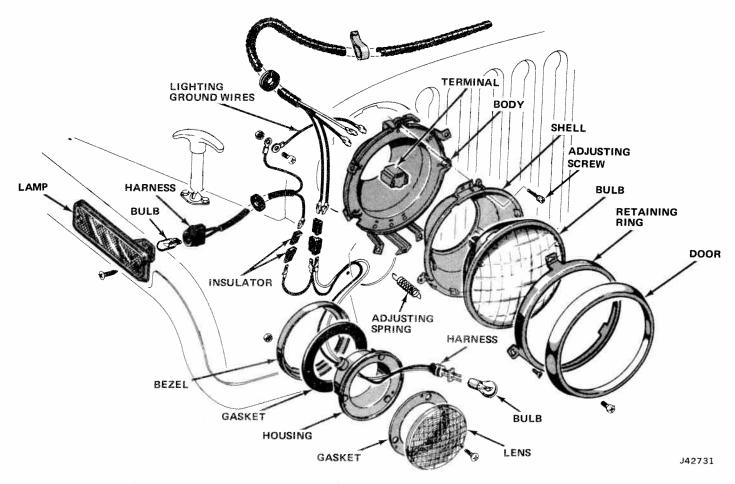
Headlamp, Parking, Directional and Side Marker Lamps - CJ Models
